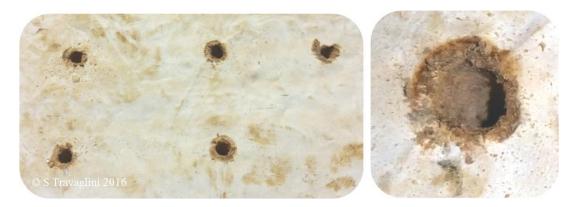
Drilling test specimen showing five test holes (left), and drilled hole close-up (right).
